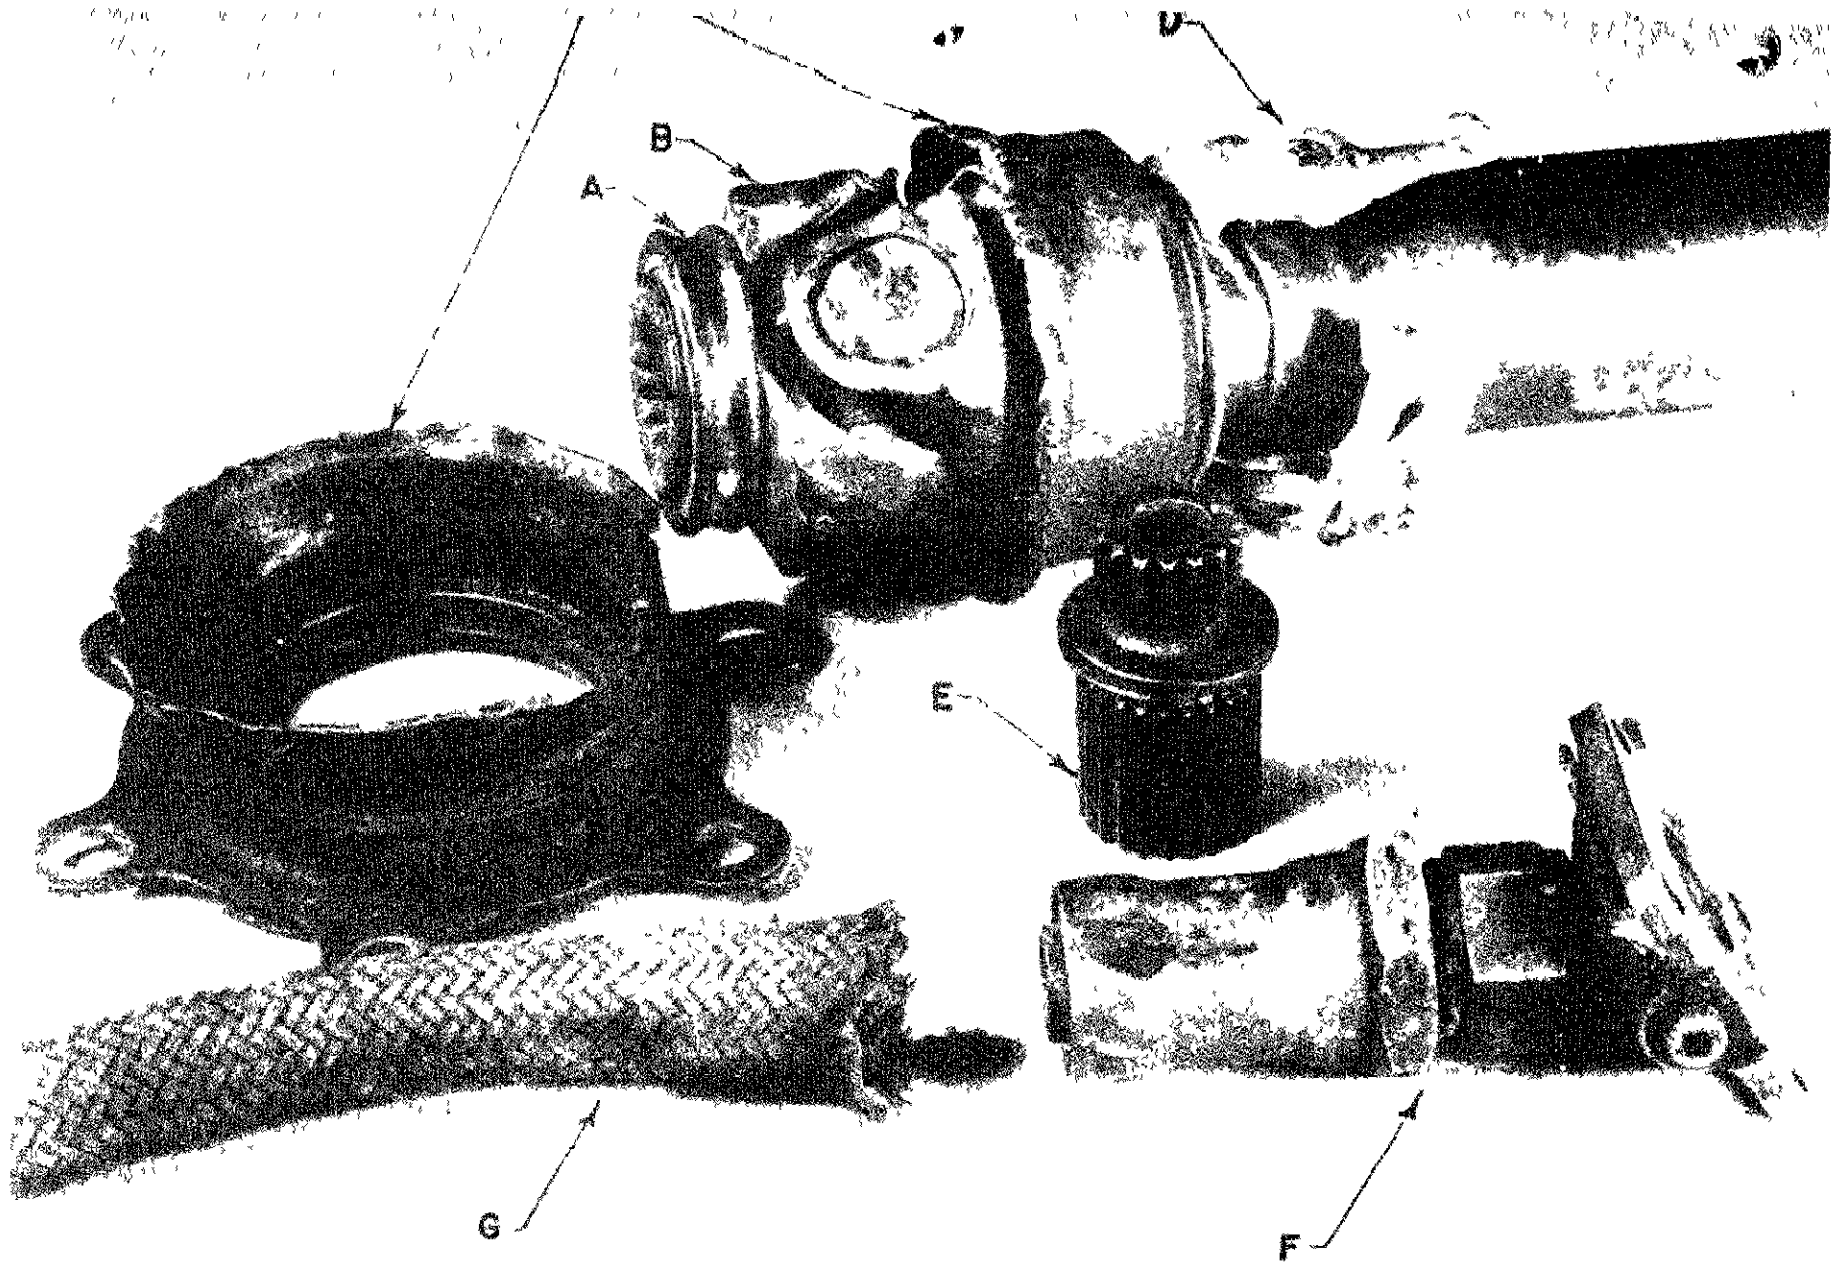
An enlarged view of the disassembly of the engine end of the cabin supercharger drive shaft and the hydraulic out-line fitting indicating the nature of the failure. A. Shaft bearing B. Universal joint, C. Universal joint housing; D. Aluminum spring-shield; E. Drive coupling shear section; F. Hydraulic out-fitting; G. Hydraulic line (rubber covering consumed exposing steel braid).
